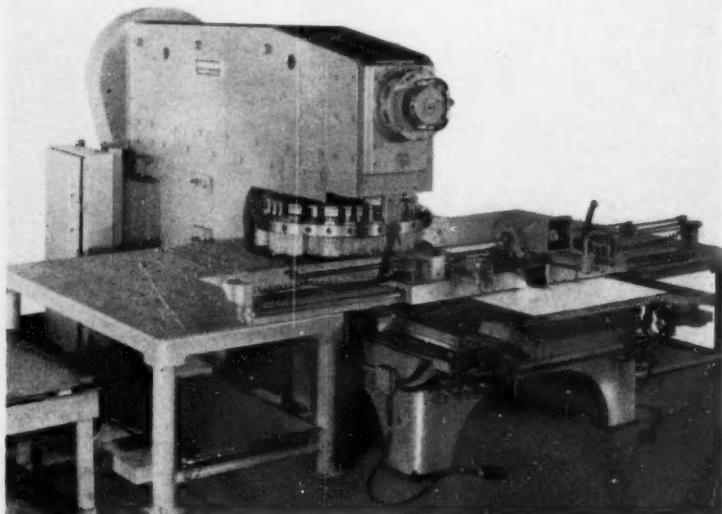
Wiedemann turret punch press equipped for both optical and stylus hole location
